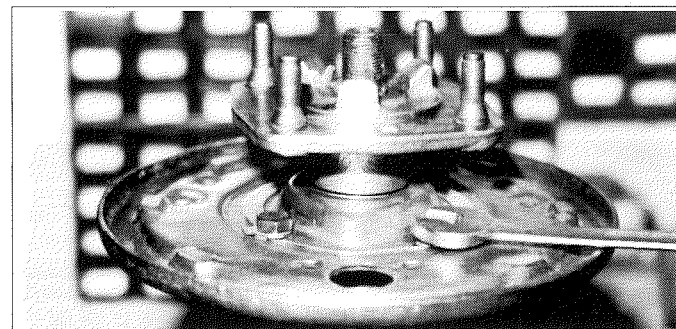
The front oil seal actually runs on a machined surface on the end of the hub. By holding the halfshaft and turning the bearing housing/back plate several times, the oil seal can be centralised onto the hub. Once centralised, tighten up the 4 bolts and tap back the tab washers.
